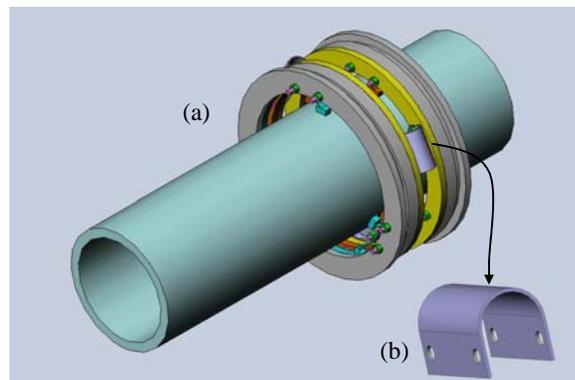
The solid model of the crawling device with the clamping rings and three SMA U-shapes strips. The spring steel bias spring strips are not shown in this picture.
